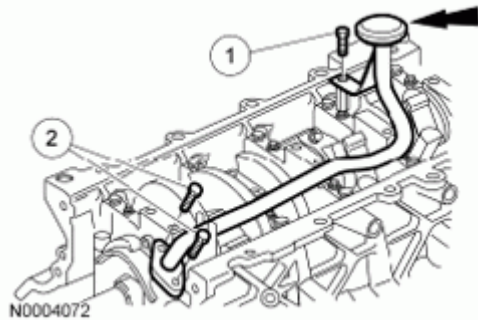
Identifying Oil Pump Screen And Pickup Tube-To-Oil Pump Bolts
